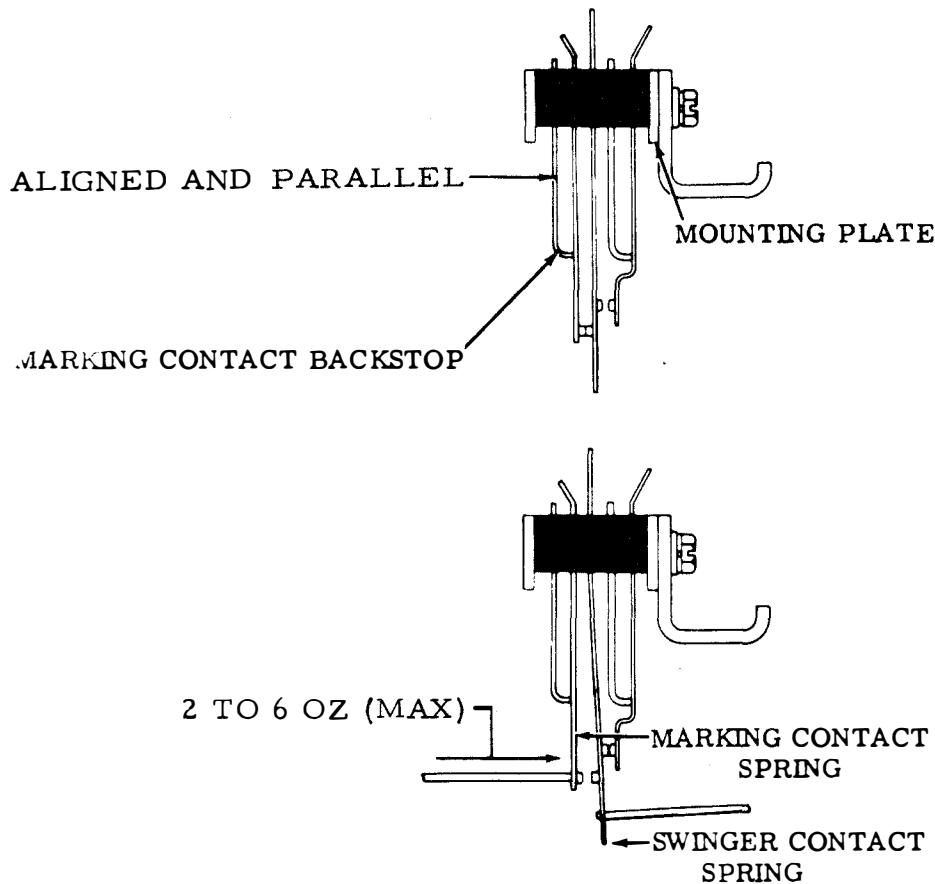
Marking Contact Backstops and Marking Contact Springs
